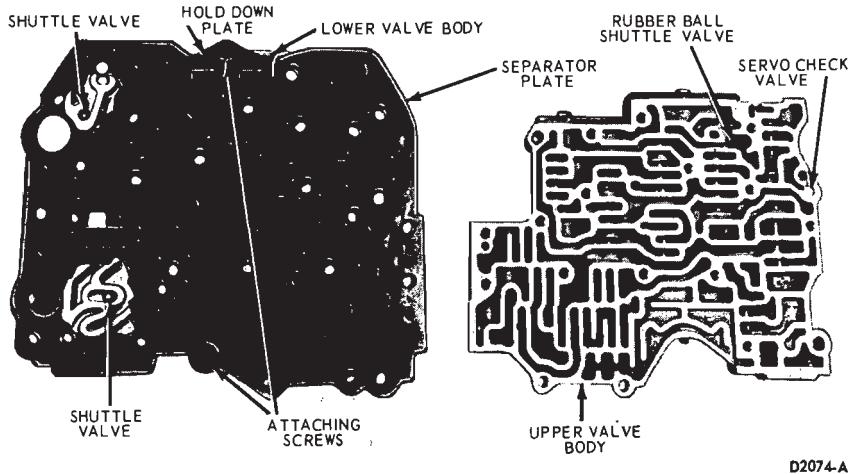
Separating Upper and Lower Valve Bodies—C4 Automatic—All Except Falcon
